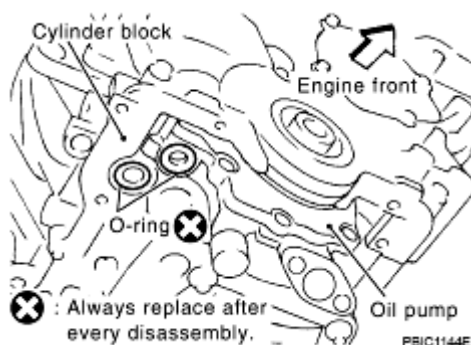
Identifying O-Rings On Bottom Of Cylinder Block
